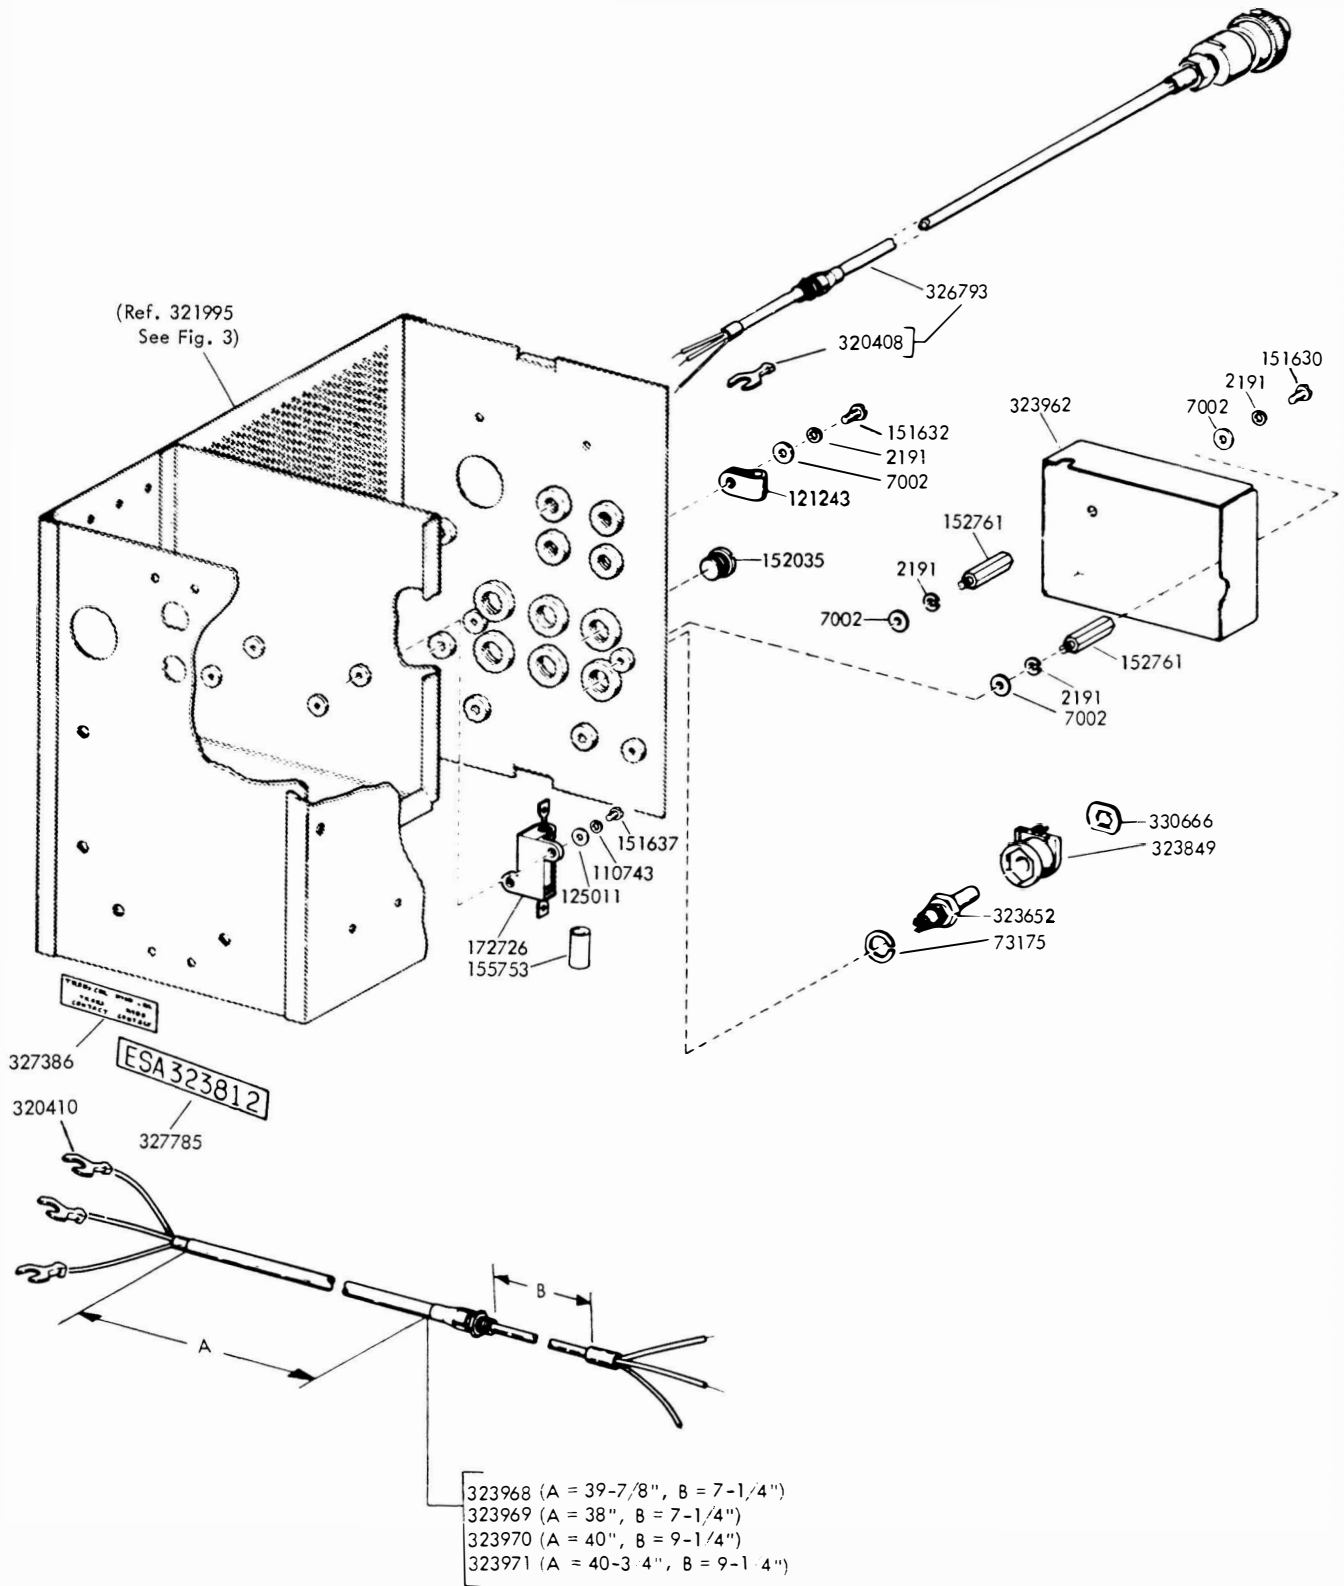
323812 ELECTRICAL SERVICE ASSEMBLY (Continued)
